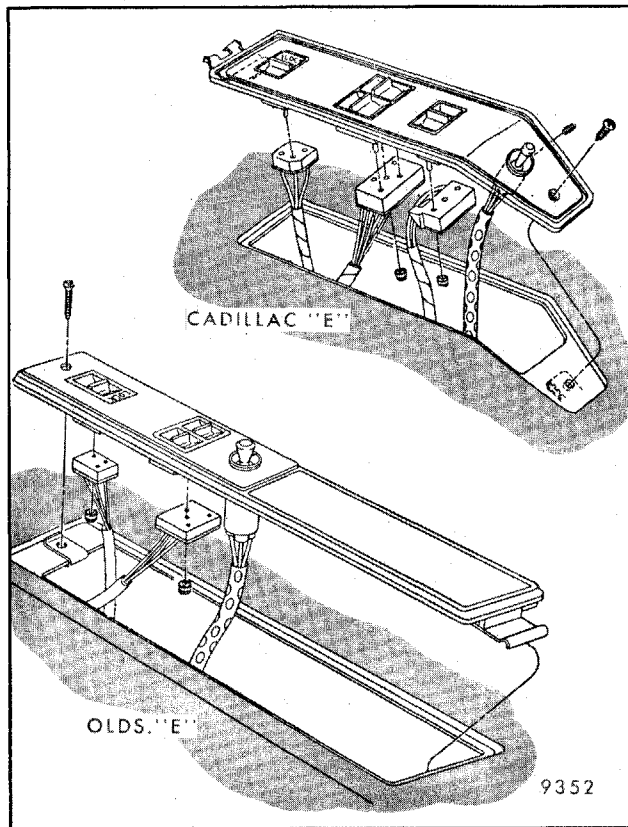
Door Armrest Switch Cover Plate and Remote Mirror Cable Attachment - "E" Styles
